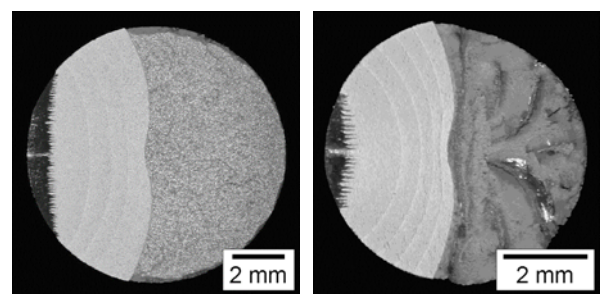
Fatigue crack front shapes in steels with an intermediate degree of cold drawing: E1 (left), E6 (right).
